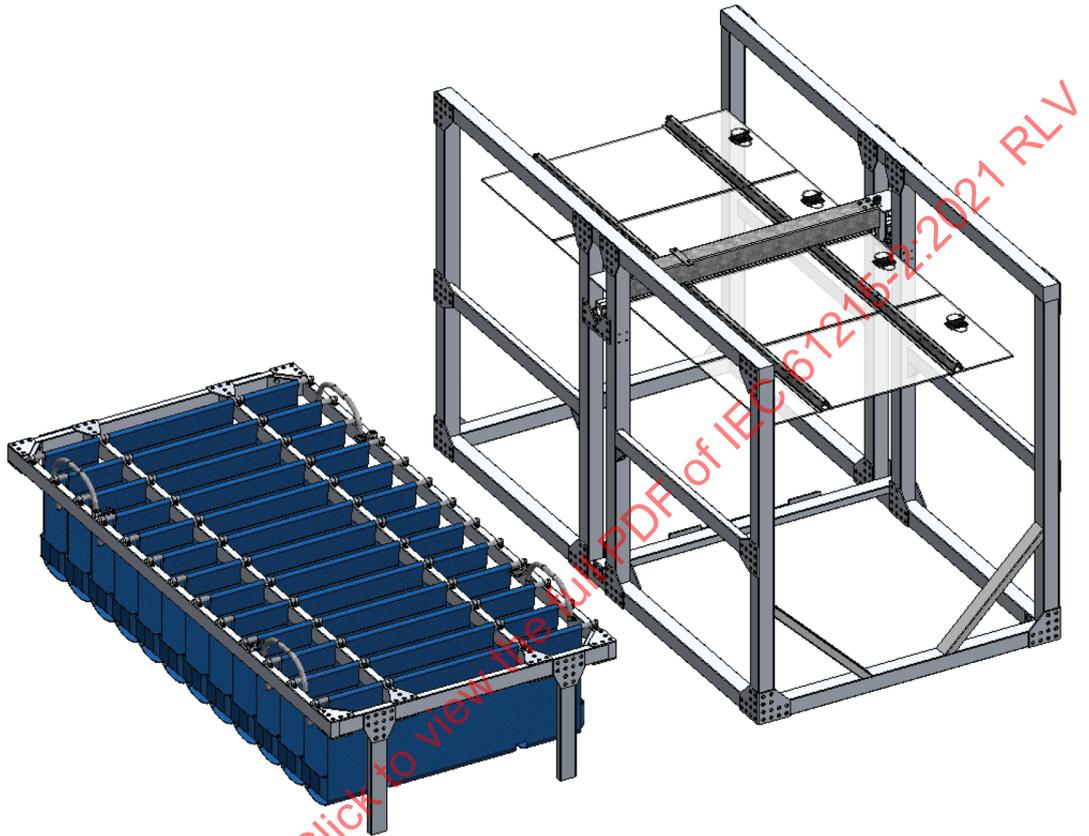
3D close up views of mounting jig (right) and loading jig (left)
